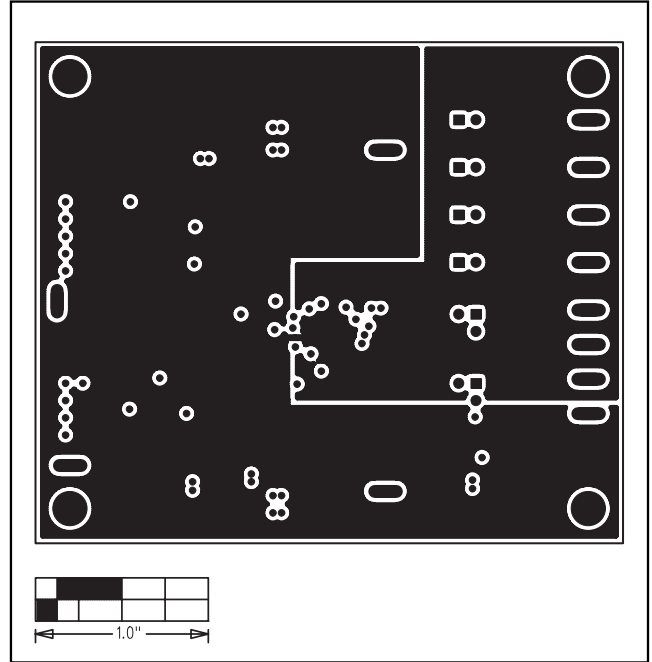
MAX8744A EV Kit PCB Layout—Layer 3
